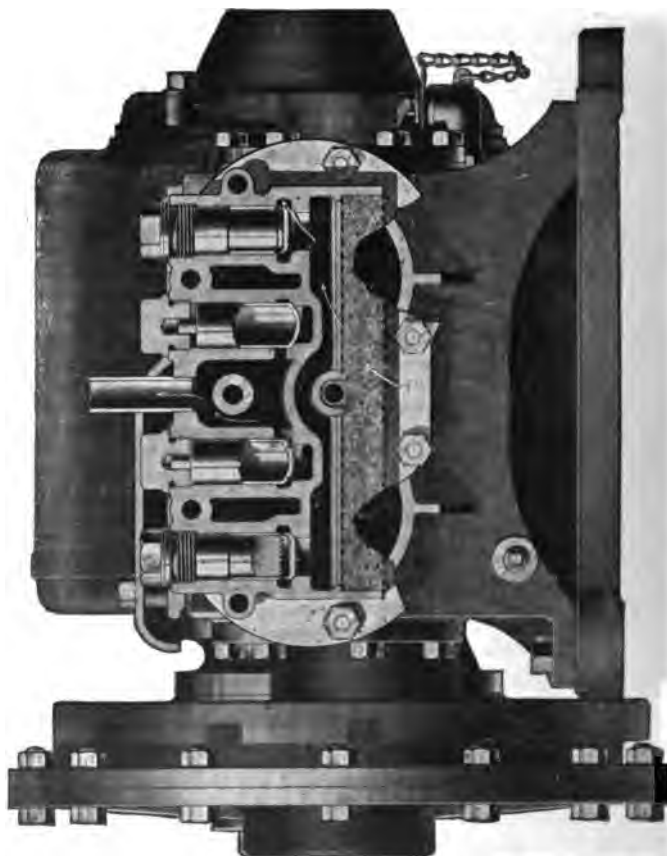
Vertical Section through the Valve-chambers of the Compressor shown in
